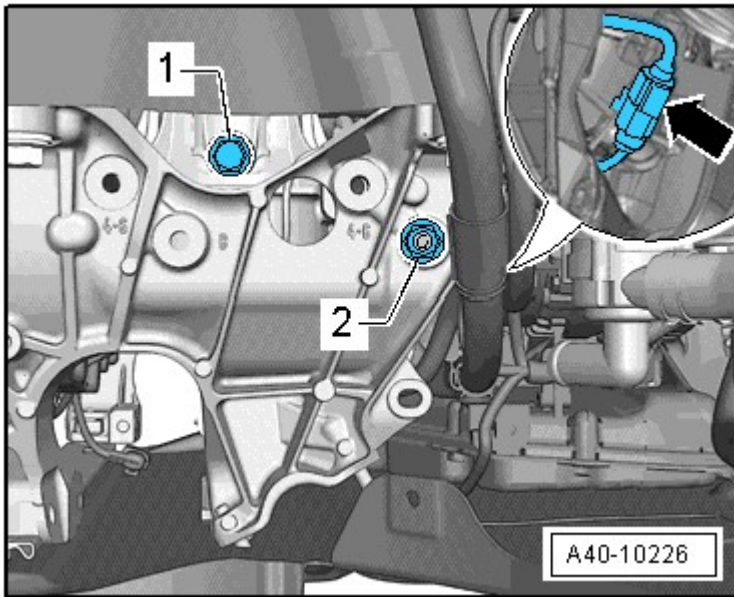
Disconnecting Left Electrohydraulic Engine Mount Solenoid Valve
